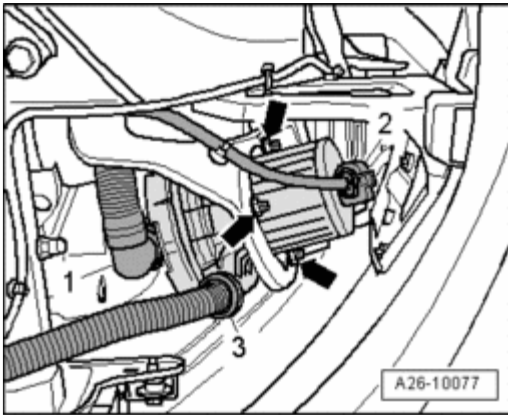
Identifying Air Guide Hoses, Electrical Connector, Nuts & Secondary Air Injection (AIR) Pump
